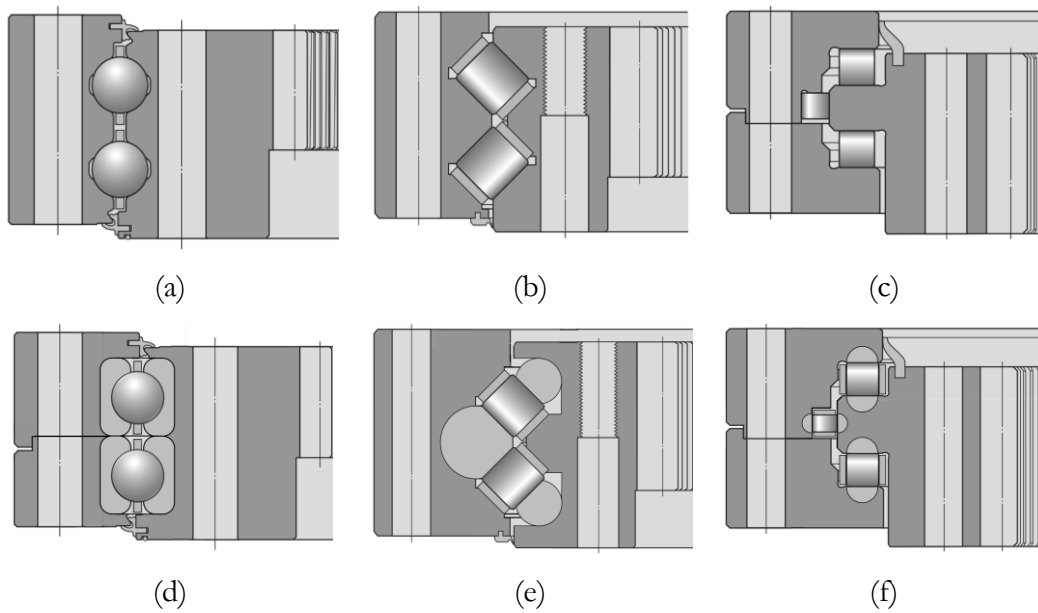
Slewing bearing types: (a) Eight-point contact double row ball [23]; (b) Double row roller [23]; (c) Three row roller [23]; (d) Four-point contact double row ball wire-race; (e) Double row roller wire-race; (f) Three row roller wire-race.
